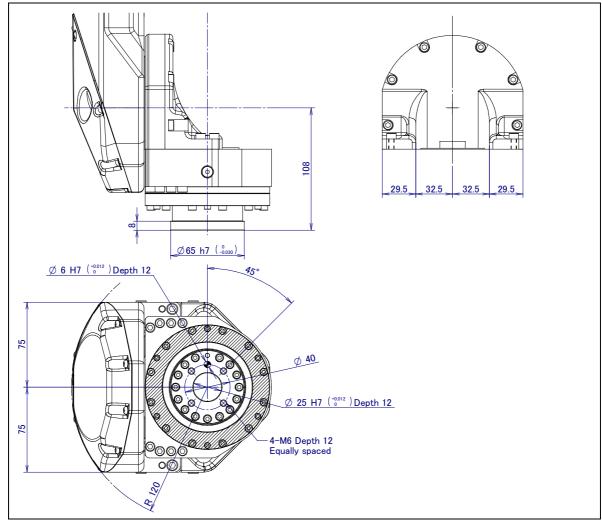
(c) End effector interface (When ISO flange adapter is installed) (ARC Mate 120iC/20T, M-20iA/20T)
